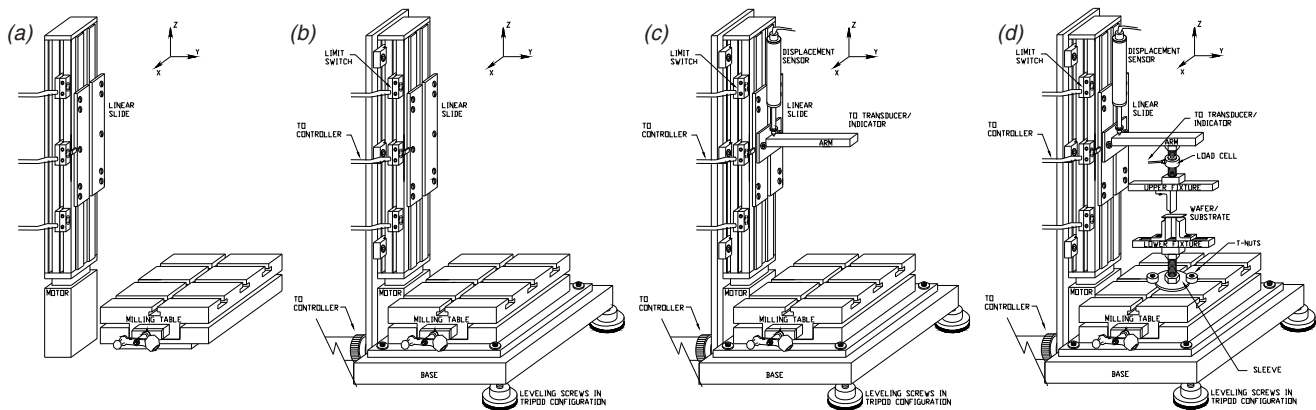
(a) Small-scale loading machine designed around a commercially-available linear slide and milling machine table. (b) Aluminum plates were fabricated to connect the slide and table and keywayed for easy and reproducible assembly. (c) An arm attached to the slide and t-slots in the milling machine table enable a variety of fixtures to be assembled in the platform, such as those shown for three-point bending (d).
